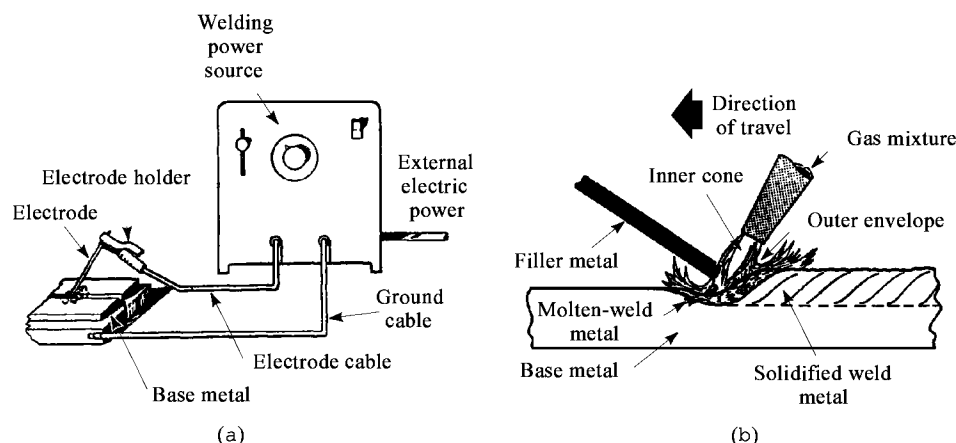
(a) The shielded-metal arc-welding system. (b) The oxyacetylene welding process.
